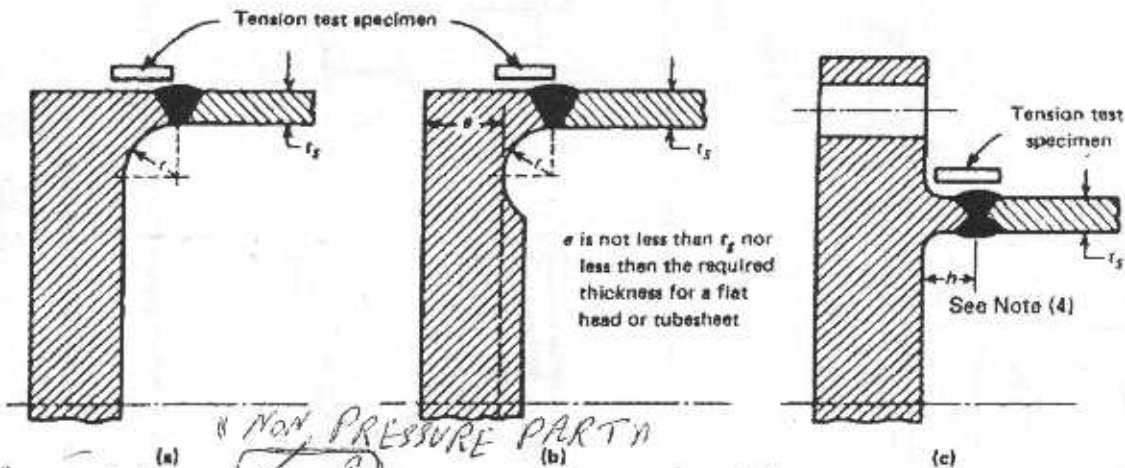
ATTACHMENT OF PRESSURE PARTS TO FLAT PLATES TO FORM A CORNER JOINT (CONT'D)
